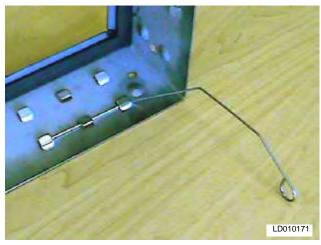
CORRECTLY INSTALLED LATCH P/N 026-35778-000.
